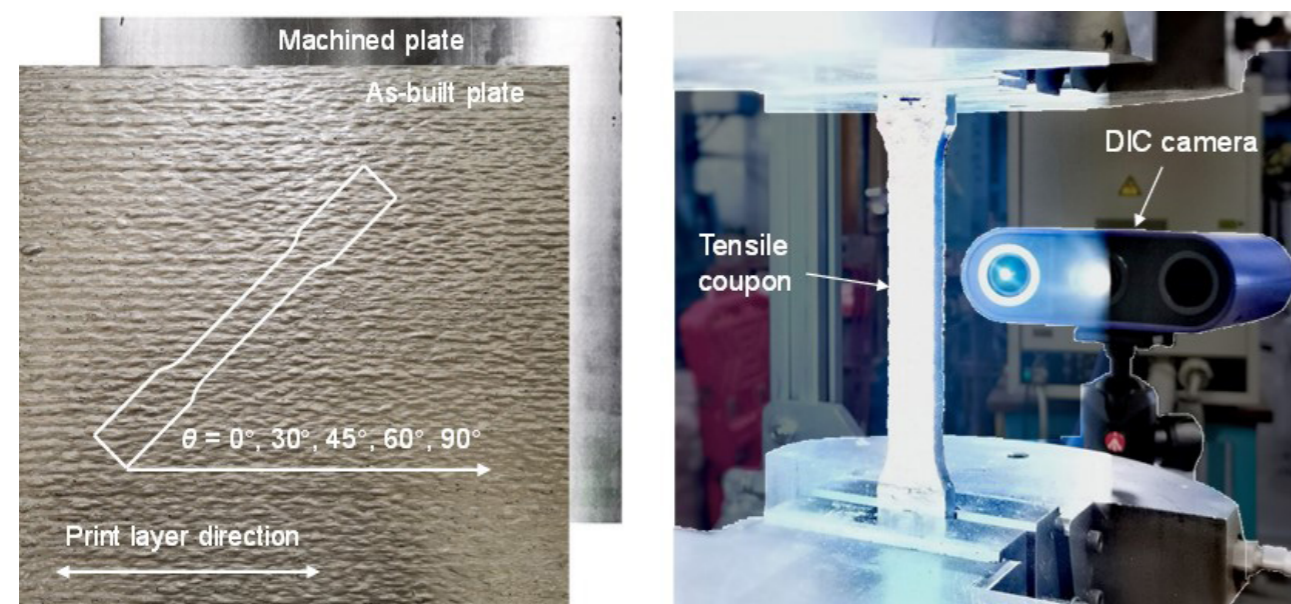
Material testing: as-built and machined sheet material (left) and test set up (right)
